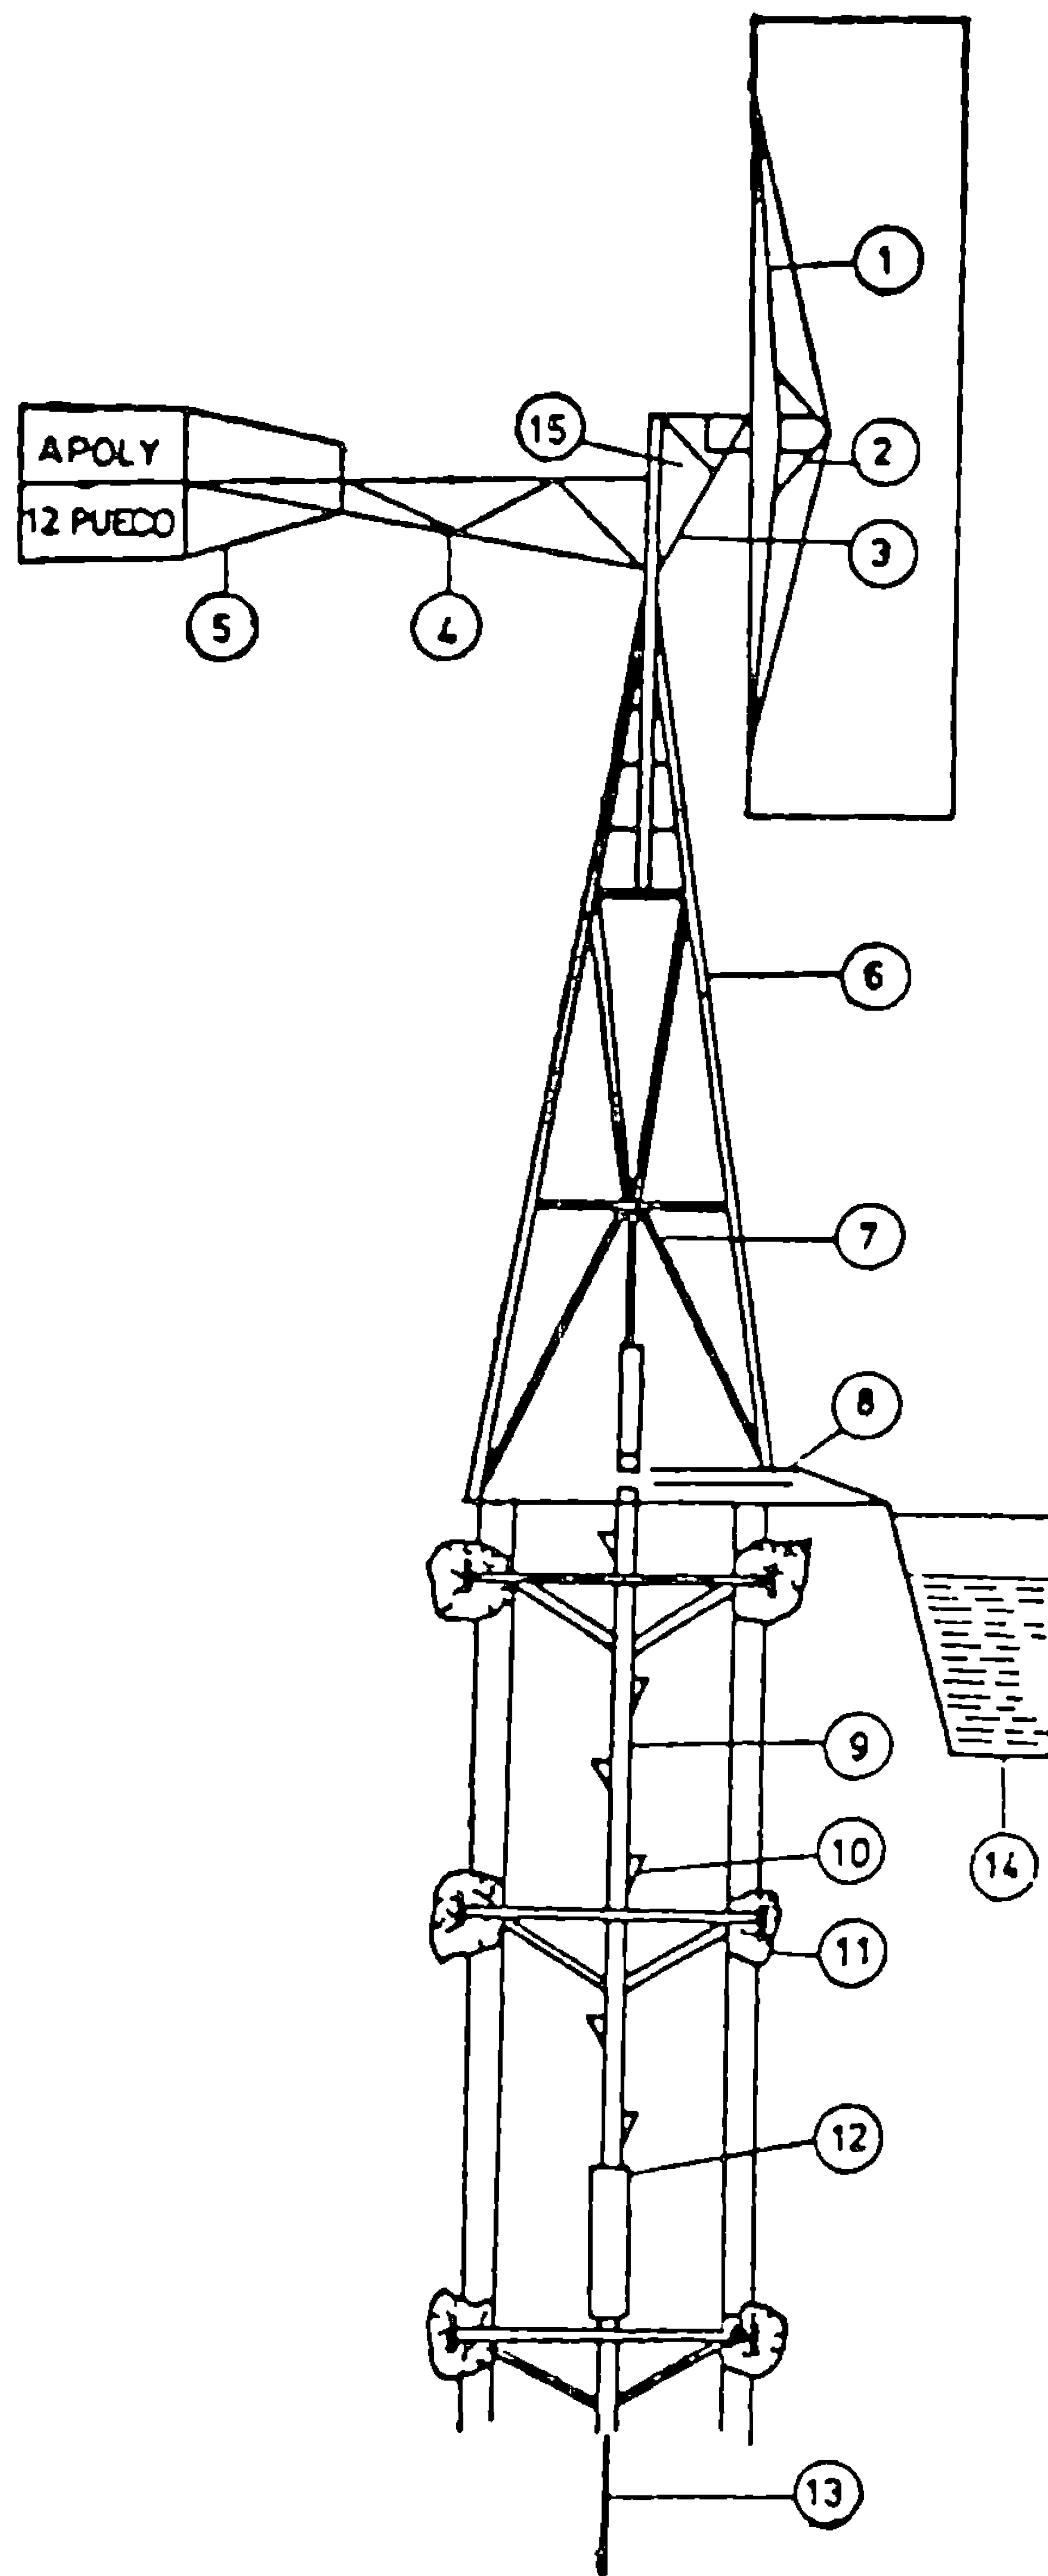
Side view of APOLY-12-UP-500 wind mill
